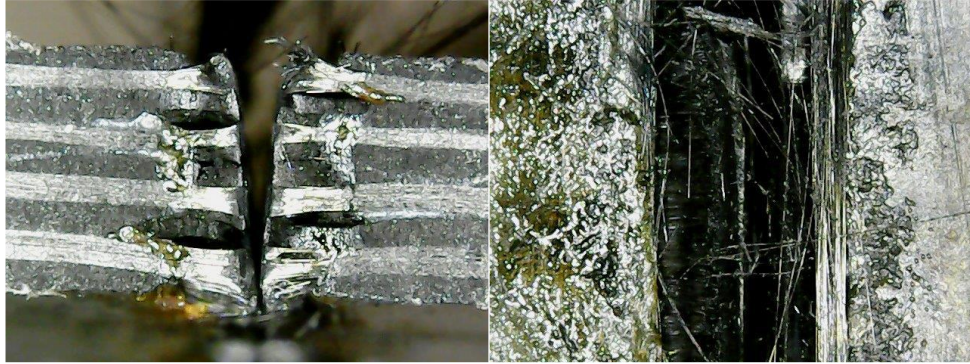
Microscope images of edge side (left) and top side (right) of laser cutting test 50.
